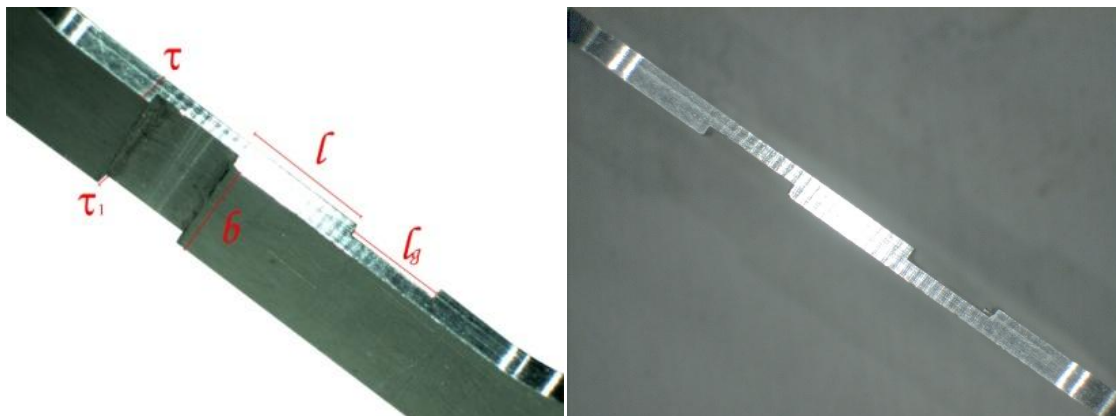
A machined shear-test sample ready for testing, seen from the side.
